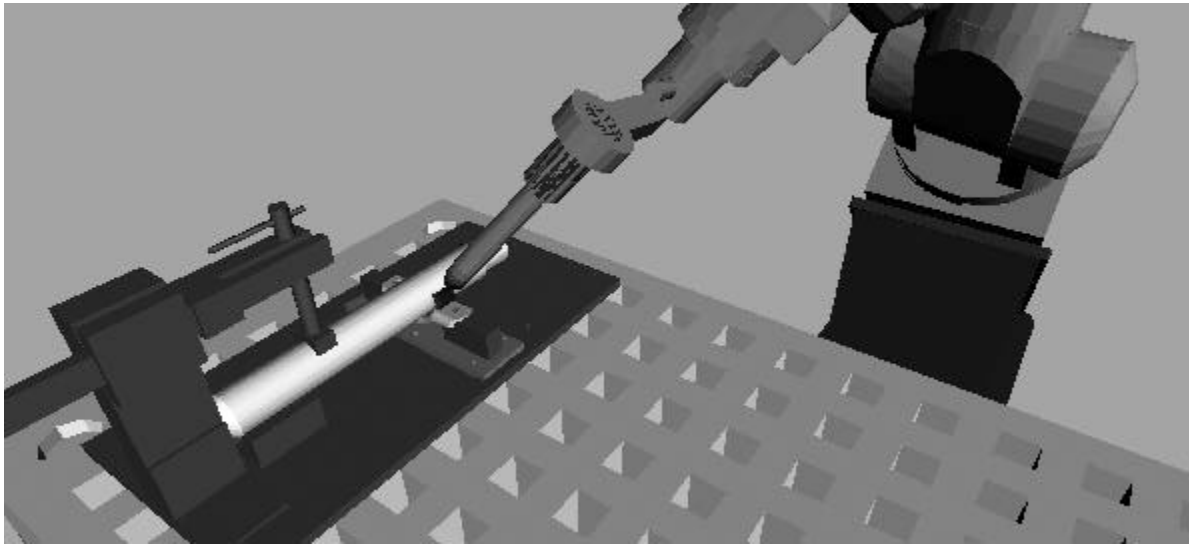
VRML model of the welding cell immediately following a weld. Note the dynamically created weld.
